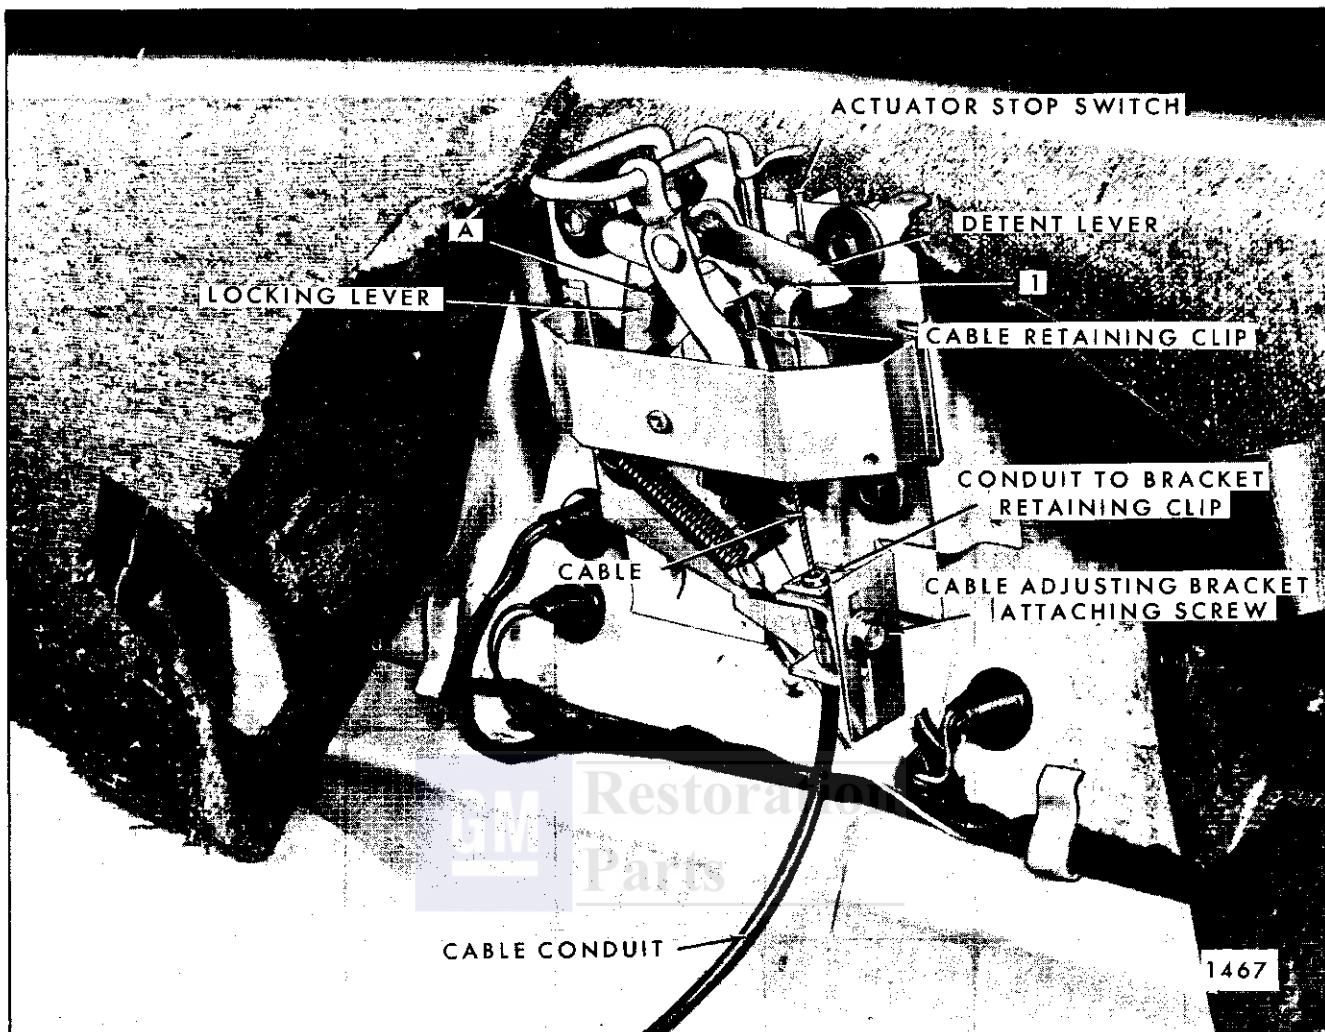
Rear Compartment Mechanical Pull-Down Unit — Cadillac Styles with Option
